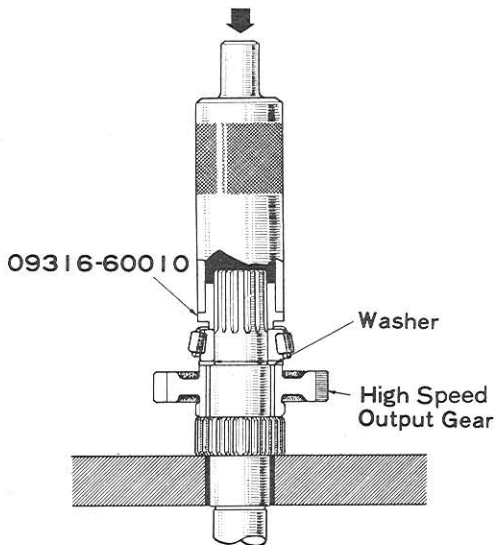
Transfer Output G2392 Shaft Front Bearing Installation
